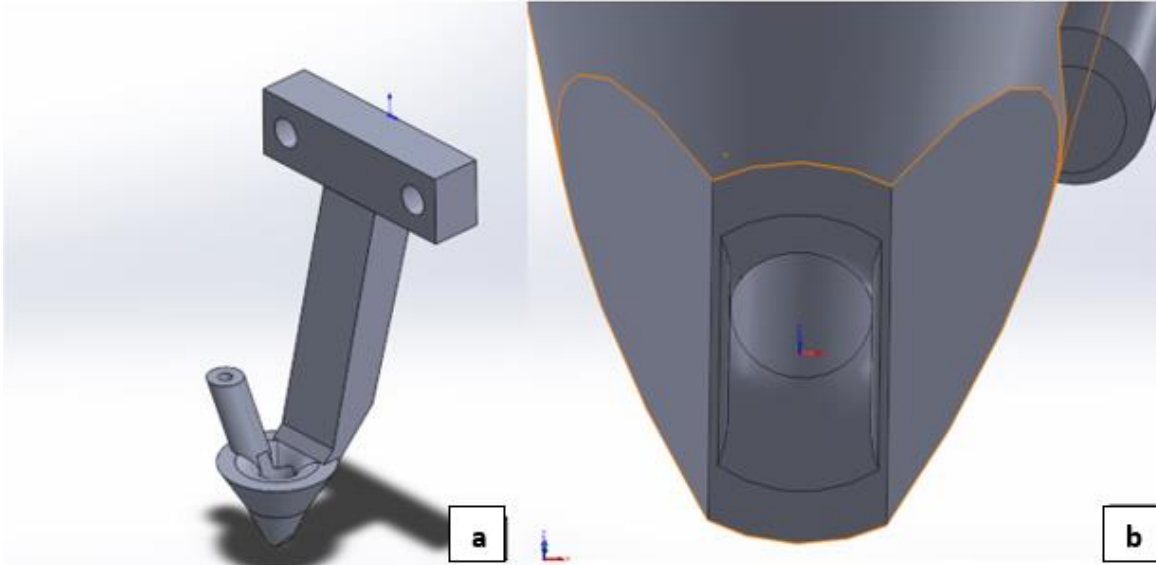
(a) 3D view of printer nozzle, (b) Tip of the nozzle
